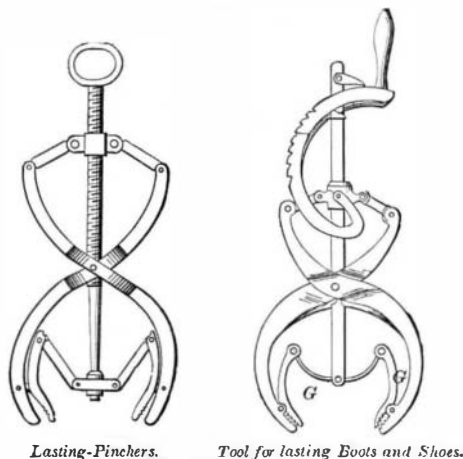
LASTING TOOLS, which are employed to grip the upper leather of a boot or shoe.
